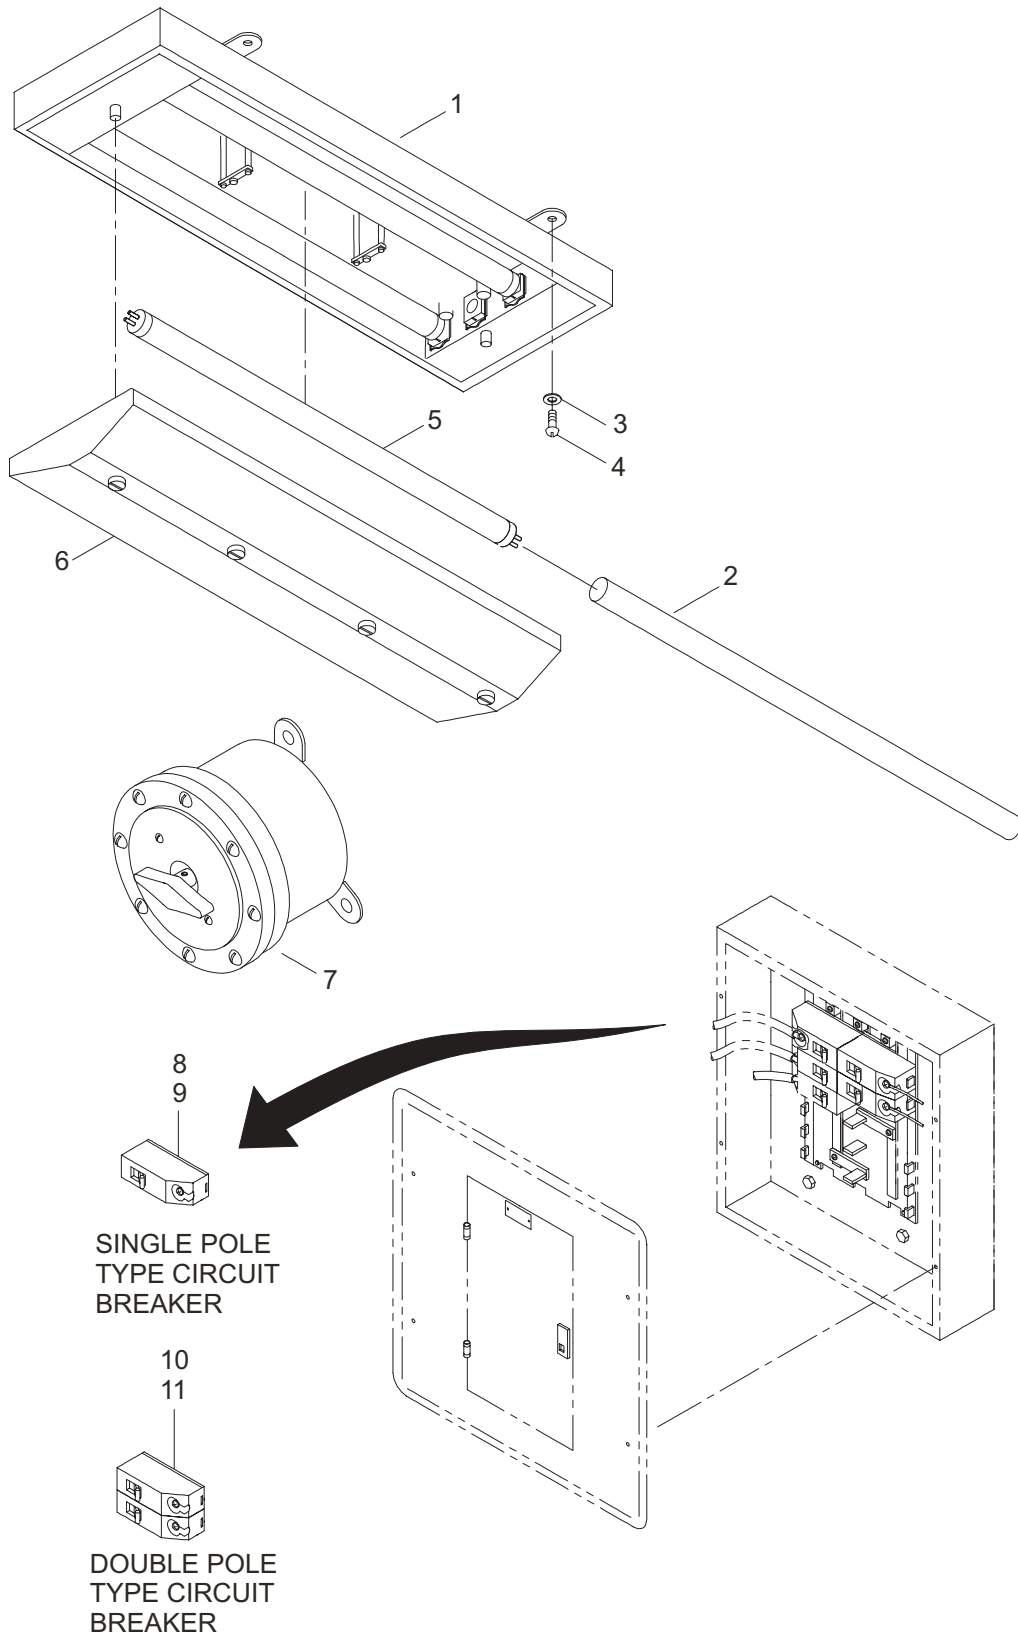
Primary Electrical Components (Sheet 1 of 2)
